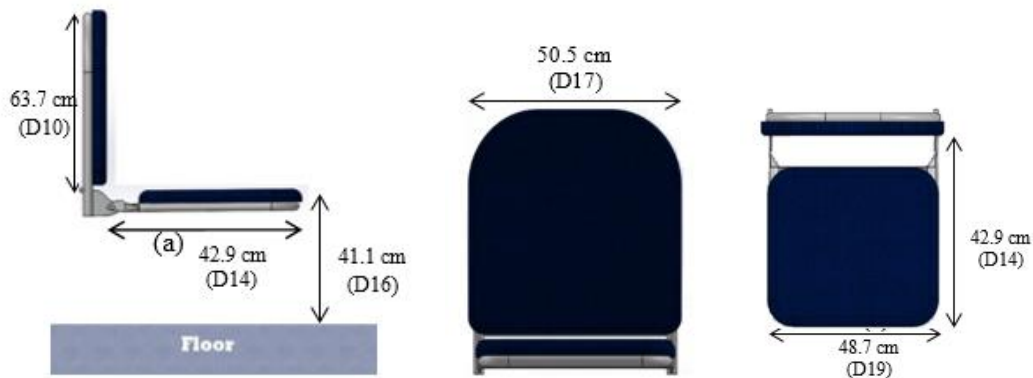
Design of a folding seat for the disabled: side view, front view, and top view
